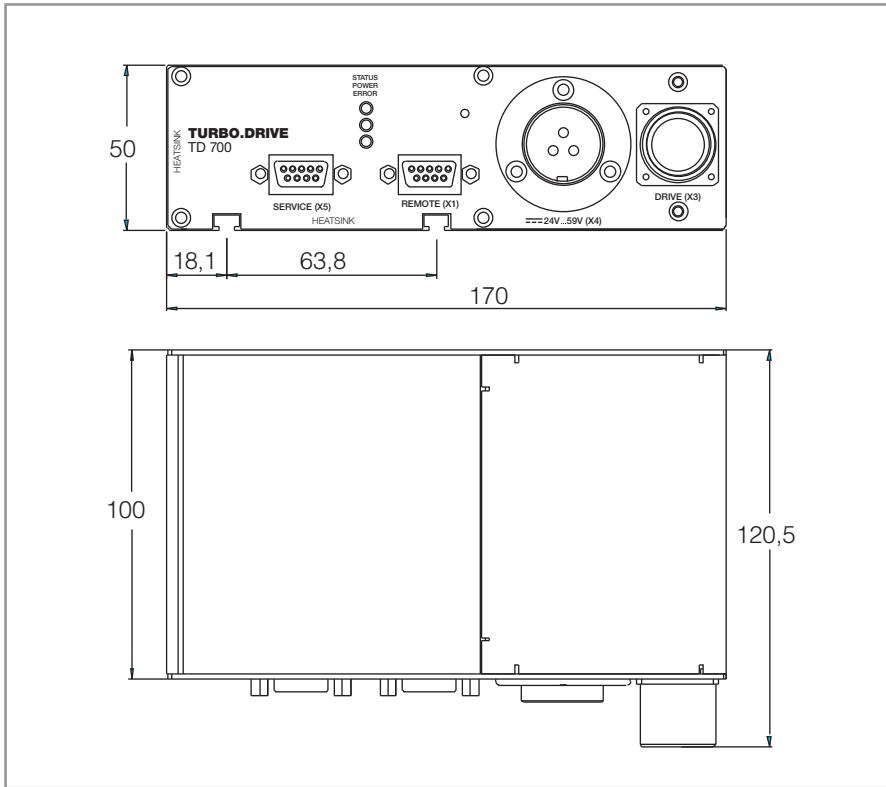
Dimensional drawing for the frequency converter; dimensions in mm
